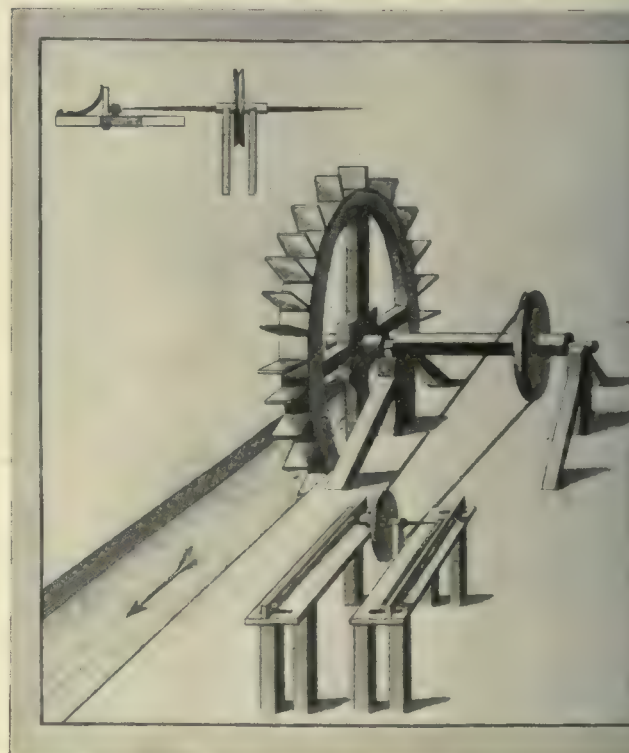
MACHINE FOR DRILLING TOUCH-HOLES, DATE 1716
